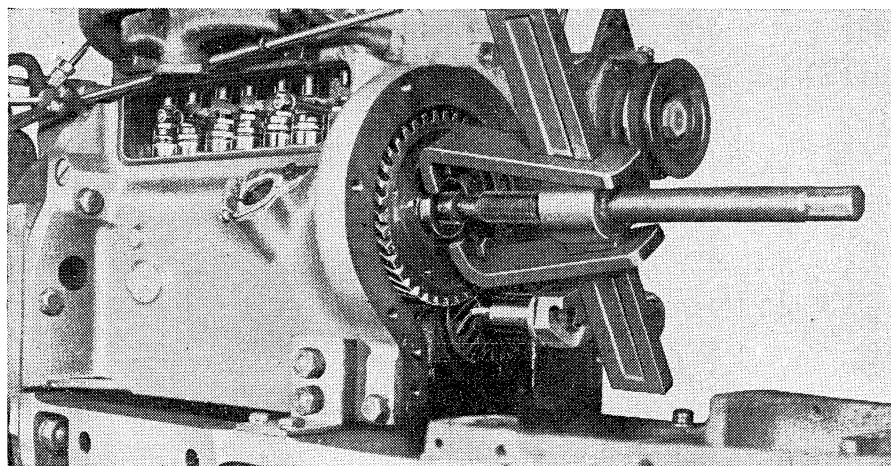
Pulling Continental N62 cam gear. Note washer between camshaft and puller screw to protect governor plunger bore. Tappets are held up by wire under heads of tappet screws.
